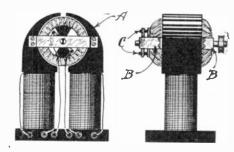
Side and end view of the generator to be driven by the water wheel in the hydro-electric plant.
